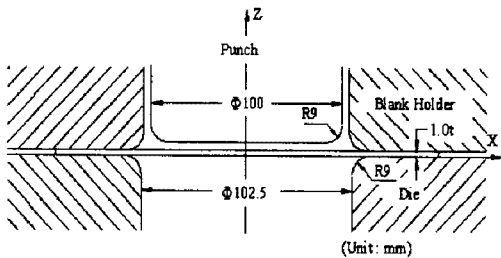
Geometric description of the tooling for deep drawing of a cylindrical cup
